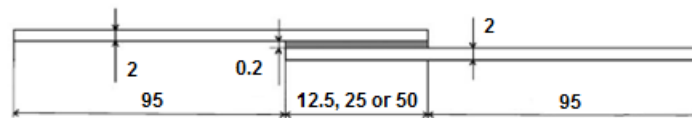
Geometry of the single lap joint specimen (dimensions in mm).
